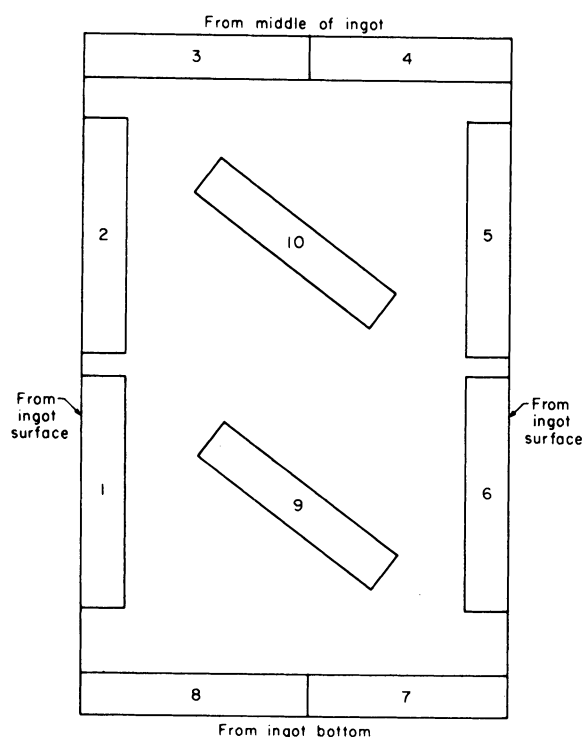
Layout of 1.27-cm (1/2-inch) plate for cutting coupons from which Charpy V-notch specimens were machined.
